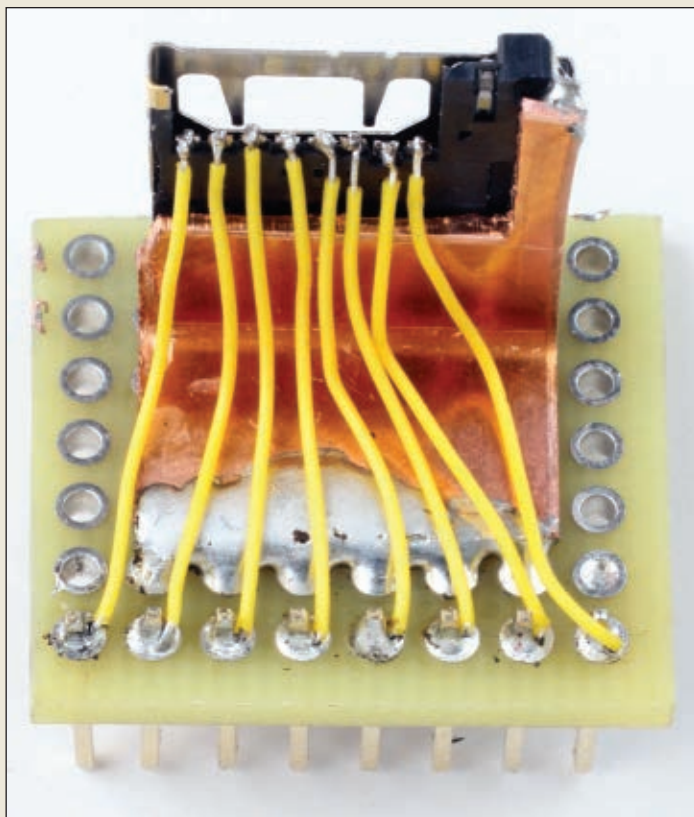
It may be ugly, but it works. You can have one of these too. Just specify Mouser part number 517-2908-05WB-MG and get out that fine-tipped soldering iron.
